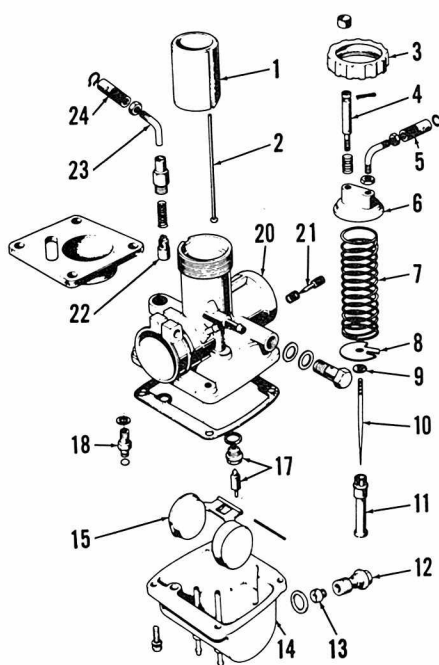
Exploded view of typical carburetor used on F6 and F7 models. Pilot jet is pressed into lower surface of body (20). Refer to Fig. K4-1 for legend.
